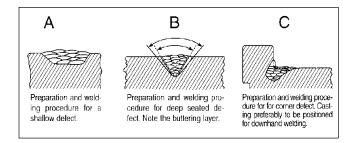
Examples of Preparation and Welding Procedures for Repairs to Defects in Castings
